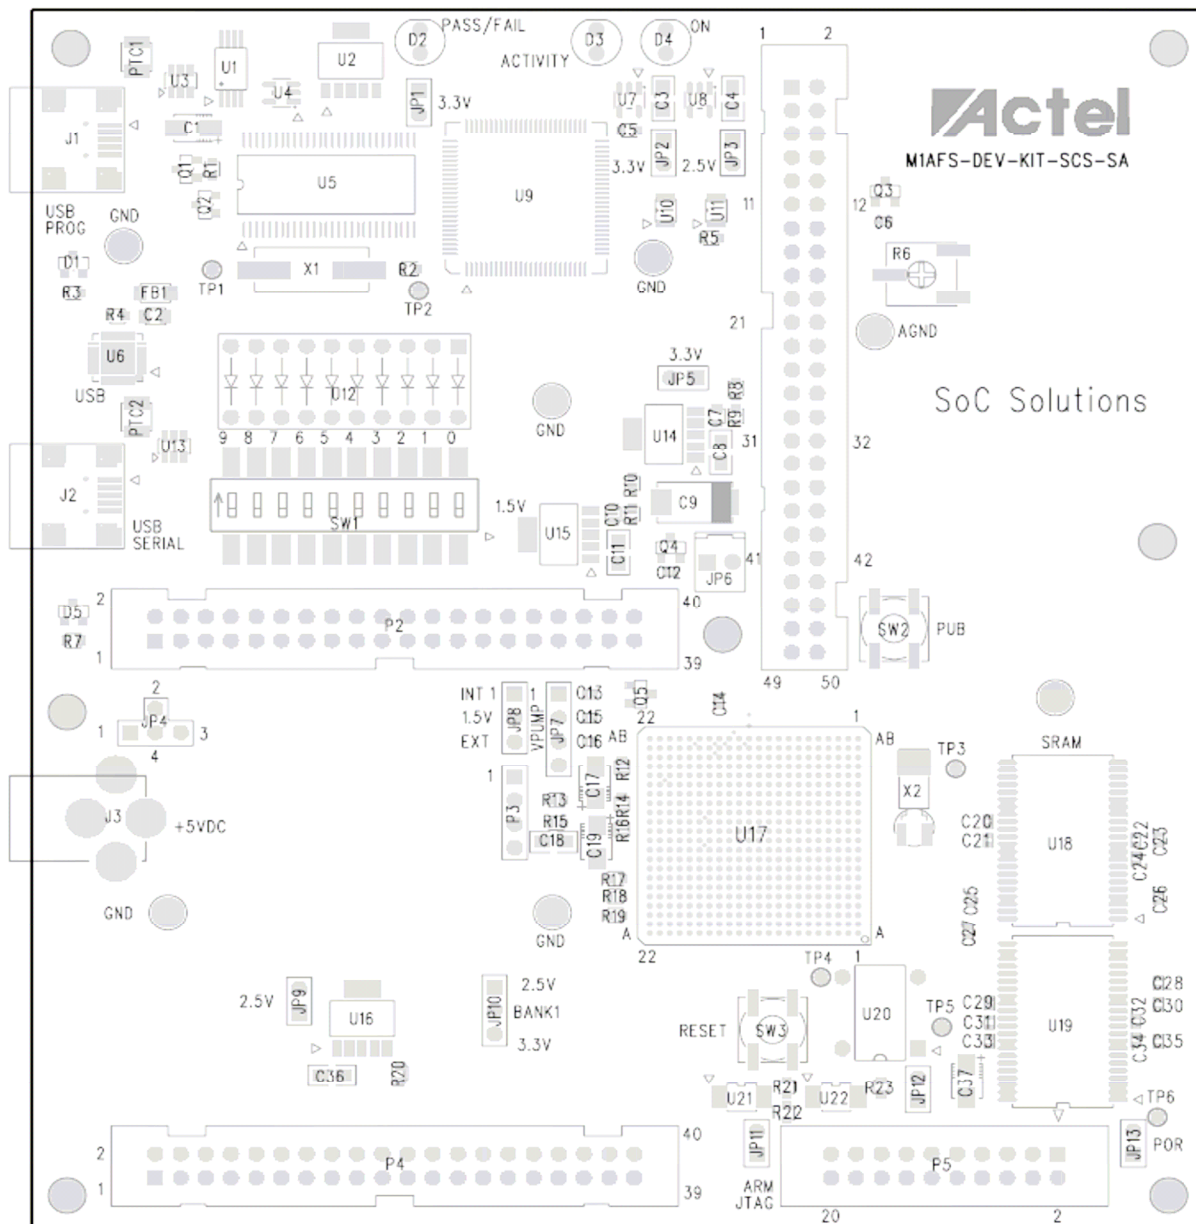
M1AFS Development Board Top Assembly Drawing
